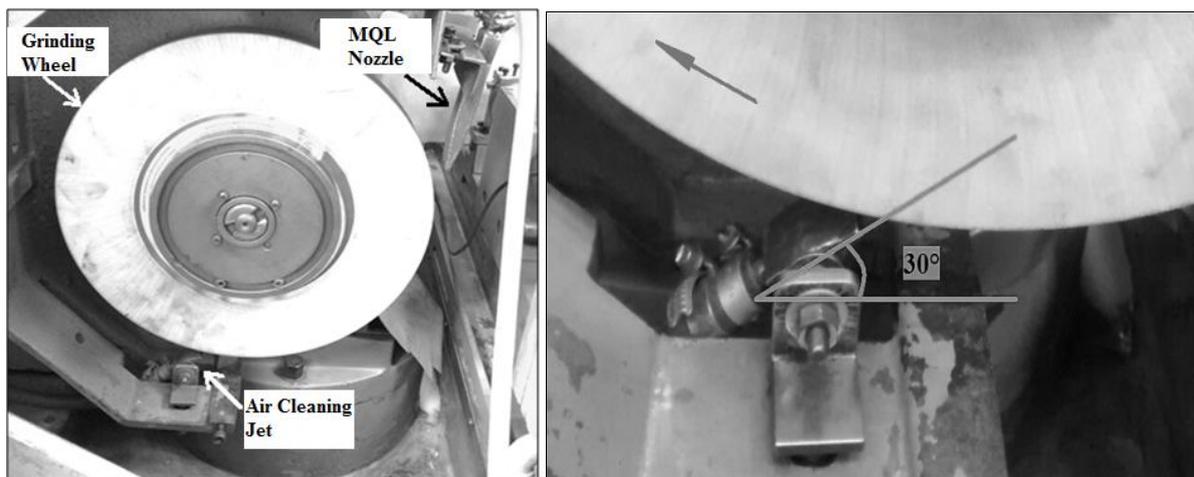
a) The MQL system and the compressed air jet in wheel cleaning; b) Details of compressed air jet.
